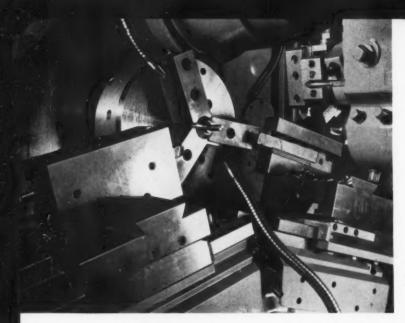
Bodies and rotating members of ball valves undergo secondary operations in this automatic single-spindle chucking machine. Setup is for typical ball member (Fig. 5). Size repeatability of shell-molded castings used for many parts simplifies chucking operations.
